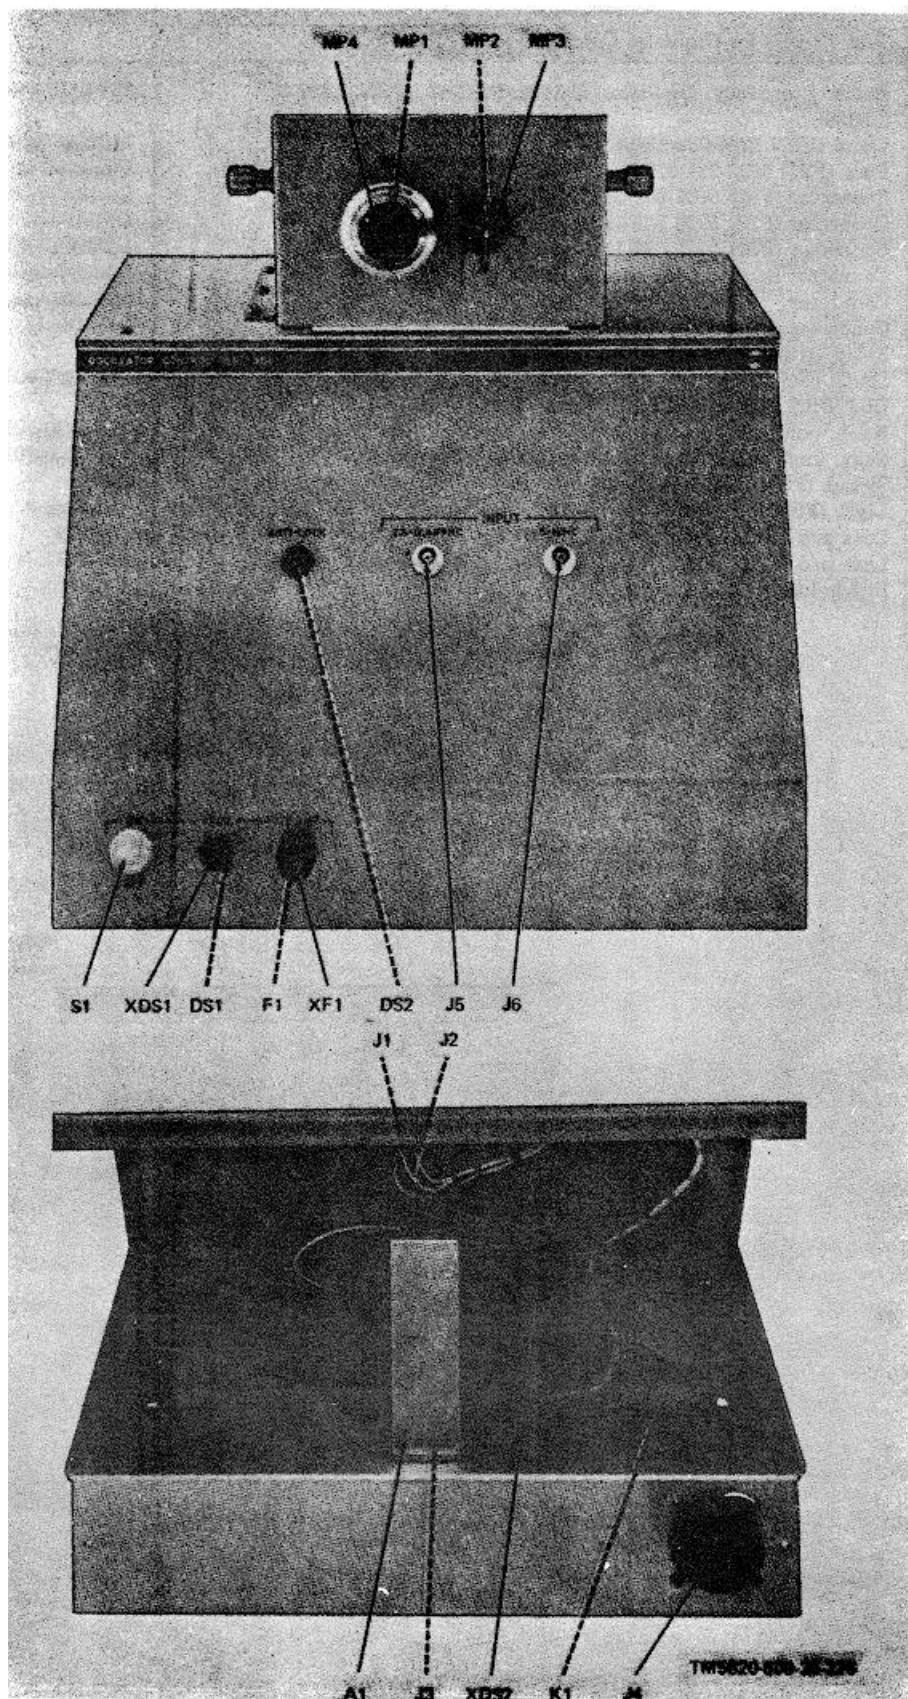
Test Fixture for oscillator Control C-4311/PRC-47, Parts Location.
